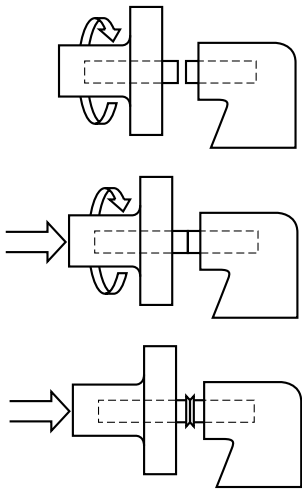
Schematic diagram of the equipment used for friction welding. (Courtesy of Materials Engineering.)
